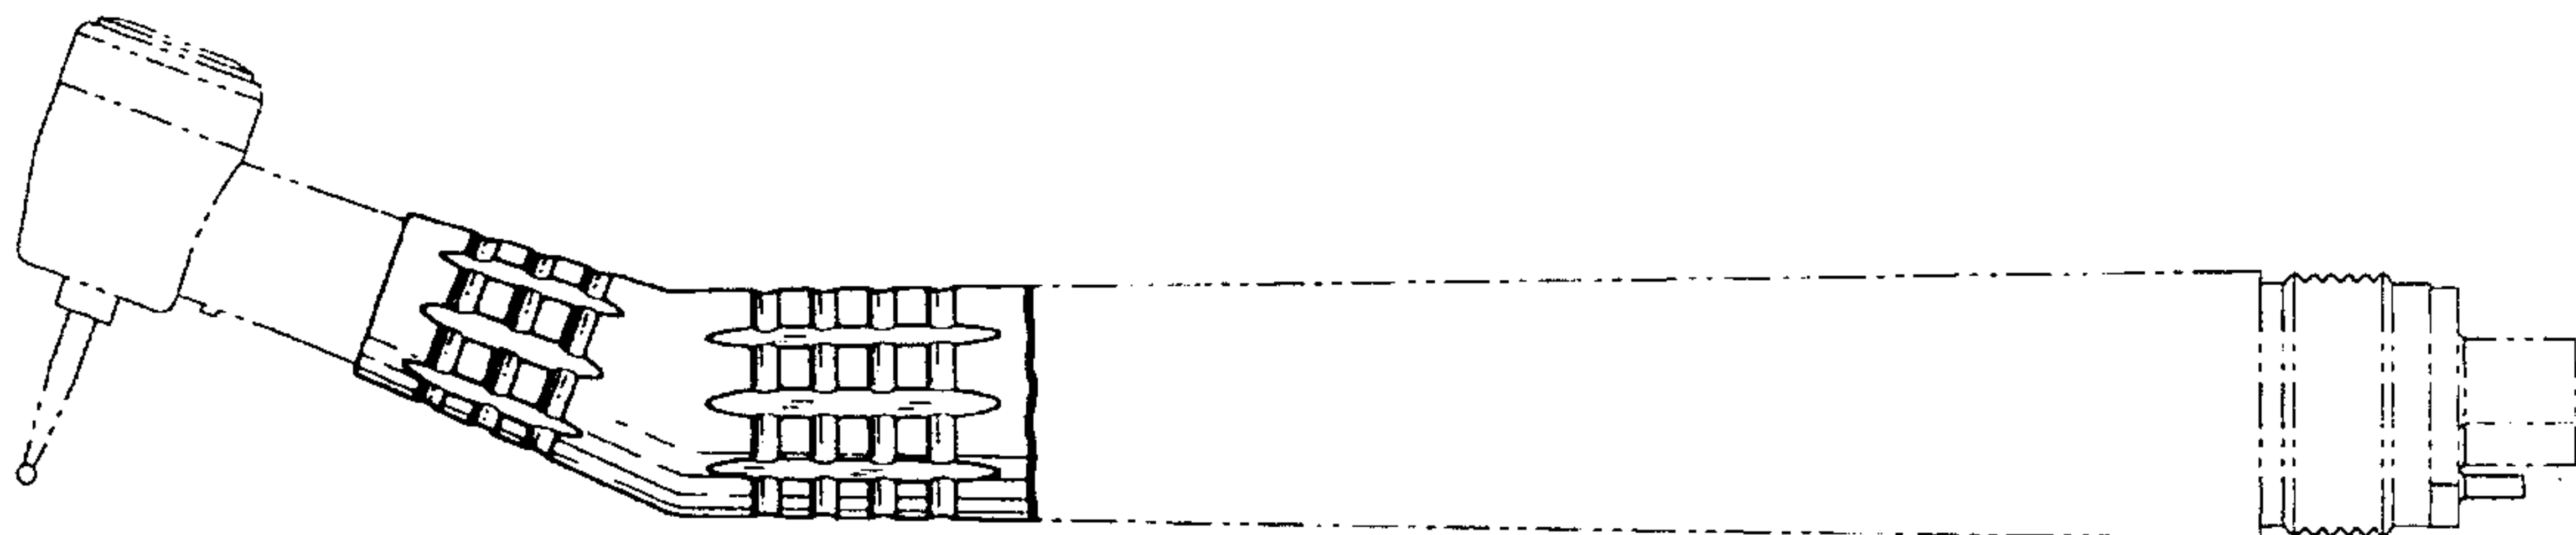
is a front side elevational view of a sixth embodiment of the design with adjacent portions of the tool being shown in phantom lines;
